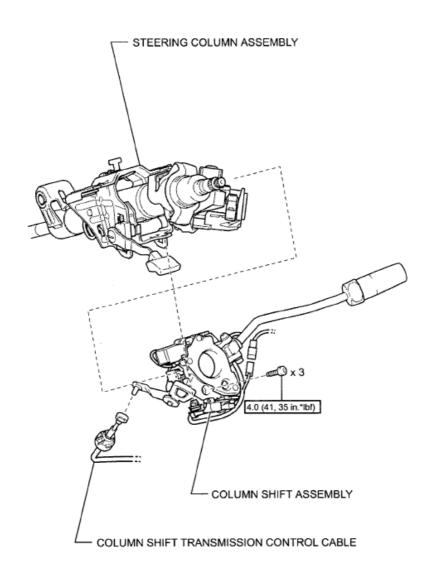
Identifying Shift Lever Assembly (For Column Shift Type) Components With Torque Specifications (1 Of 3)
